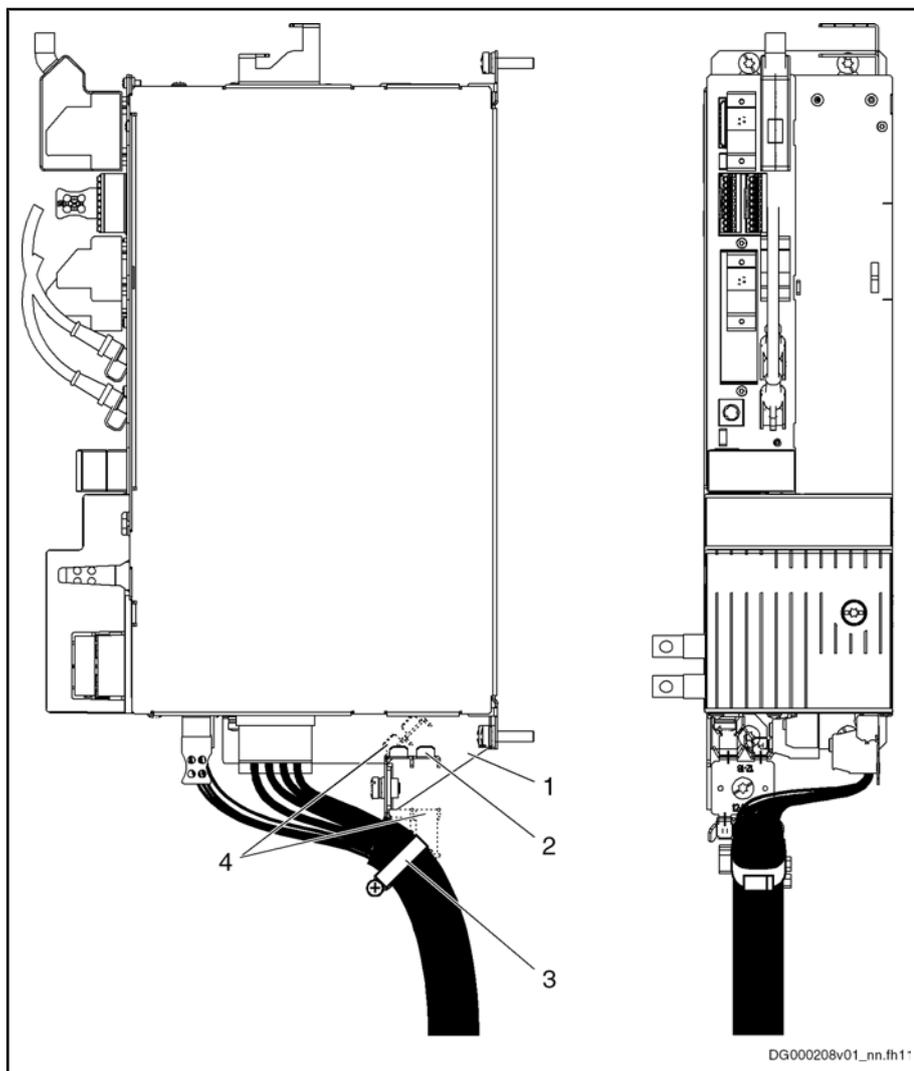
HAS02.1-001 at bottom of drive controller HMS01.1N-W0054
